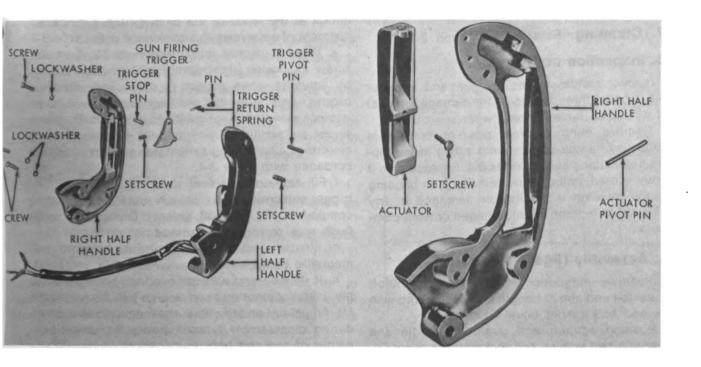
Commander's control disassembly or assembly (3 of 4)
